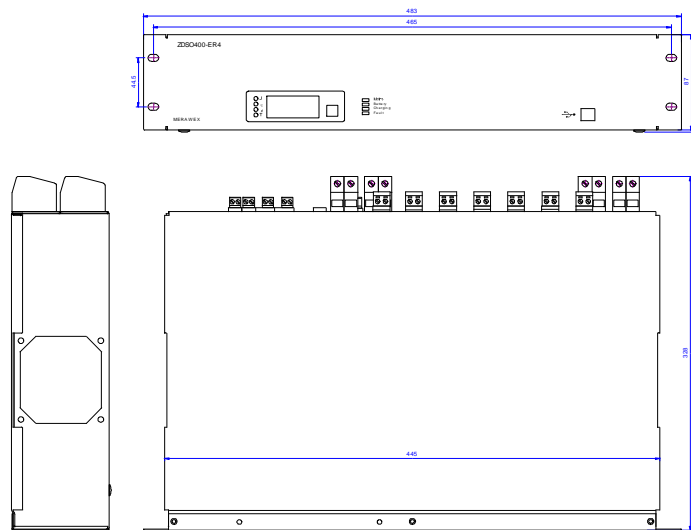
View and nominal dimensions of ZDSO400-ER4 emergency supplies
